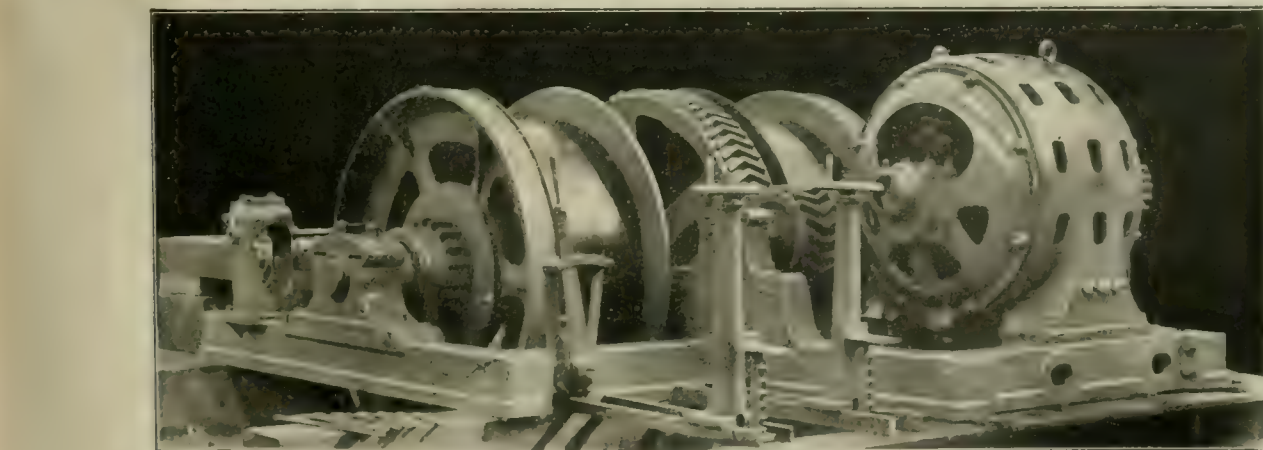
WINDING ENGINE SHOWING AUTOMATIC BRAKE GEAR.
